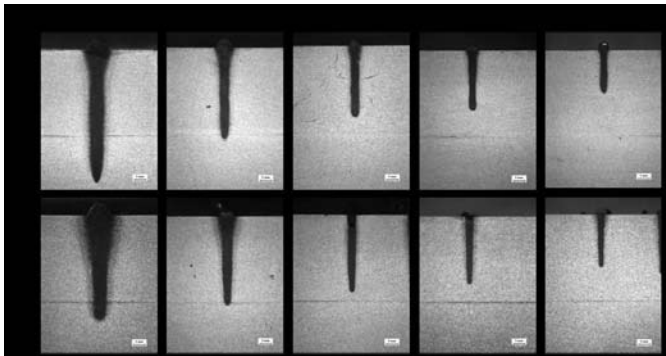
Cross sections that show welding penetration at different speeds (from left to right 2, 4, 6, 8 and 12 m/min) for gas laser TruFlow (upper row) and solid-state laser TruDisk (lower row).
